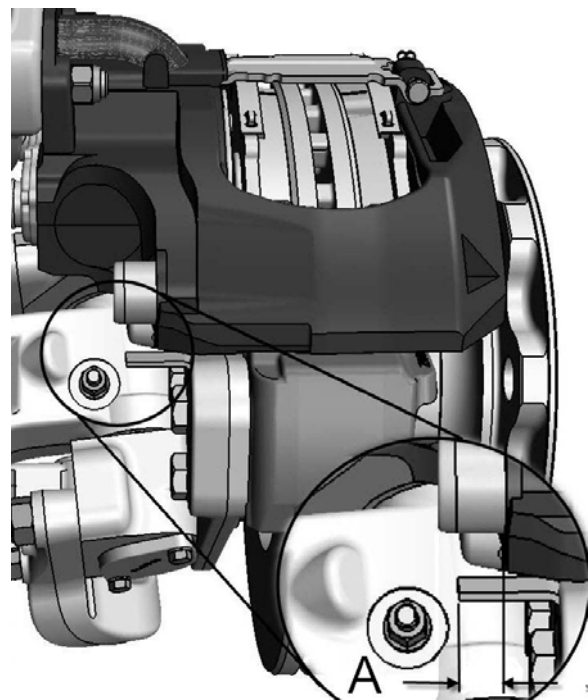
BRAKE PAD WEAR INSPECTION 12119
